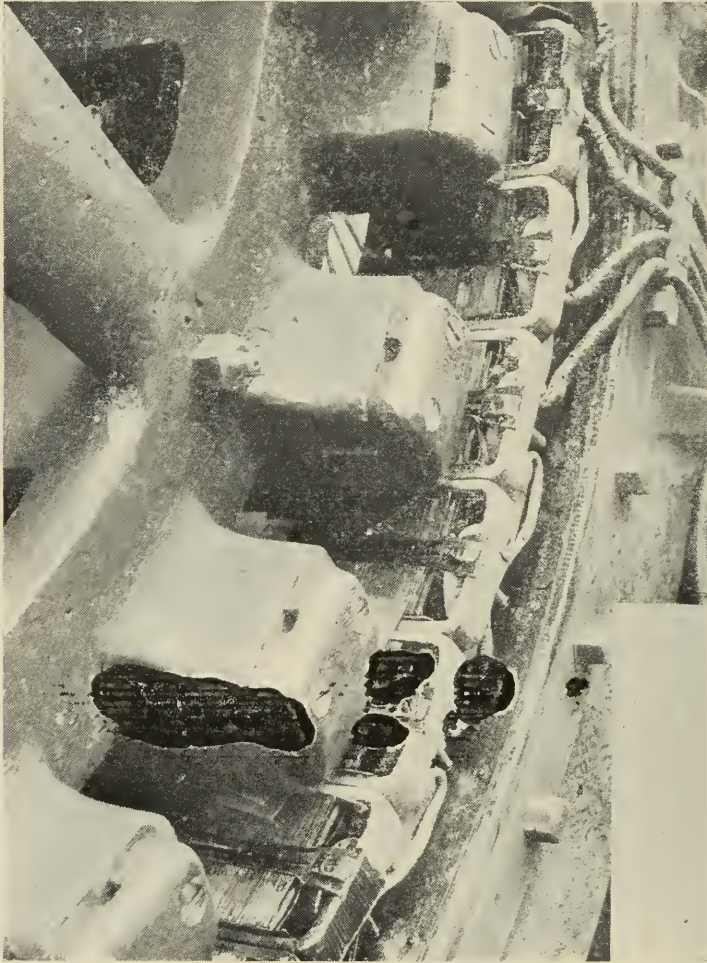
No. 16 machine, 843. Coil clamps and connections.
